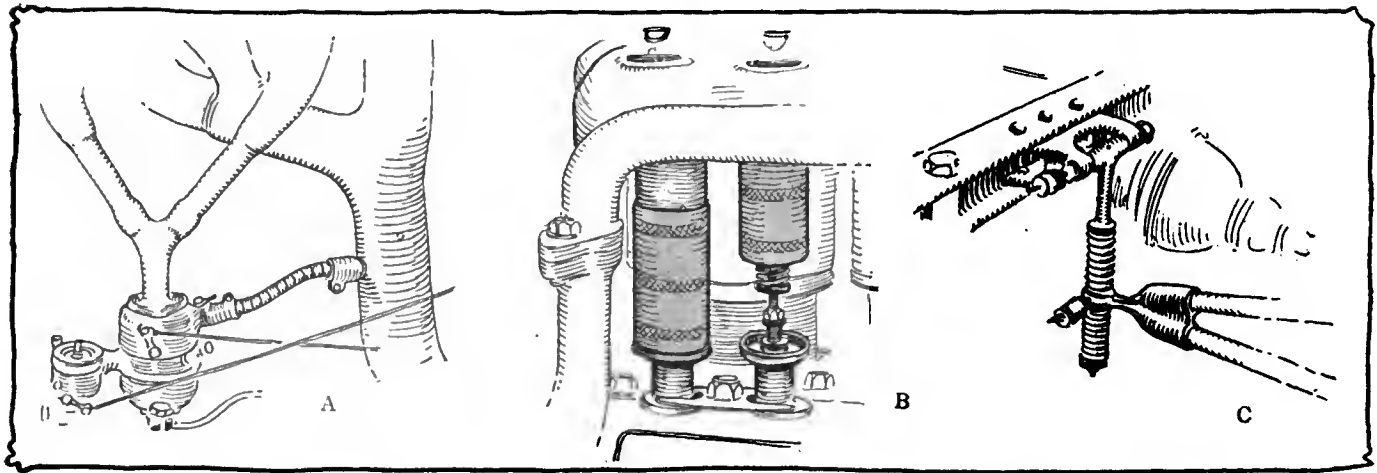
A, Bulck hot-air carburetor jacket; B, Cadillac valve action covers; C, Cadillac torque connection
